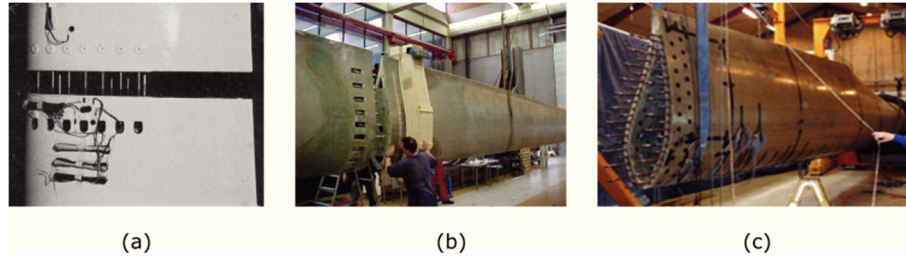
Prototype segmented blades using a T-bolt joint. (a) DEBRA-25 blade. Reproduced from Ref. [107]. (b) Split blade tested under the JOULEIII project. Reproduced from Ref. [23]. (c) Blade tested under the MEGAWIND project. Reproduced from Ref. [56].
